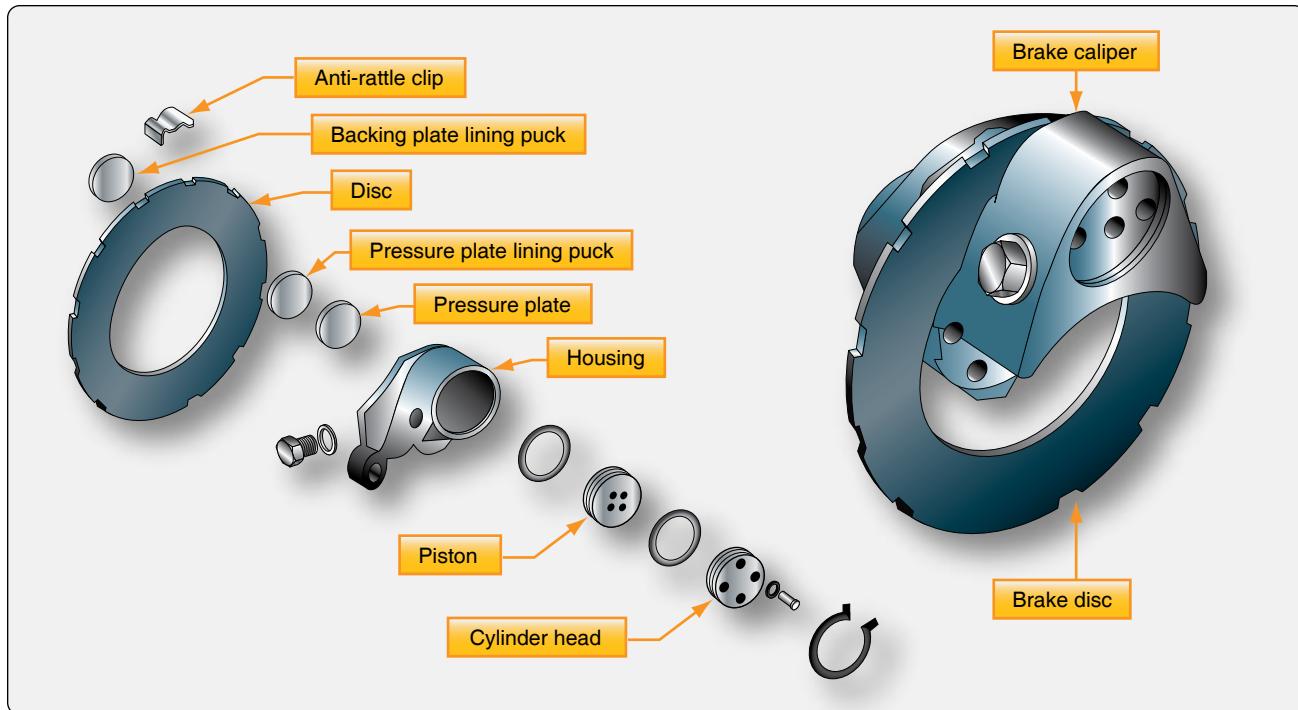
Goodyear brake lining replacement requires that the wheel be removed from the axle to access the brake assembly. The lining pucks slip into recesses in the brake housing.
